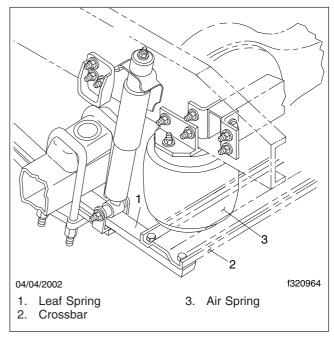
, Leaf Spring and Air Spring Assembly (23,000 and 46,000- pound suspensions)
